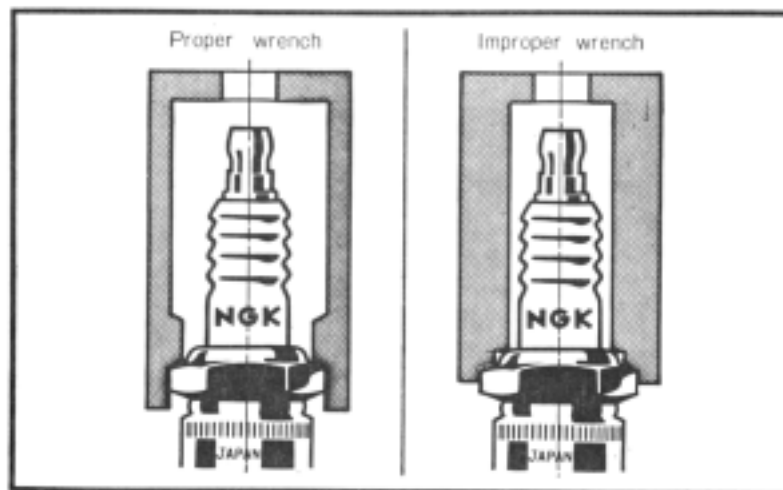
The socket wrench must be in full contact with the hex shell and clear of the fragile insulator. (Courtesy NGK Spark Plug Co., Ltd.)
